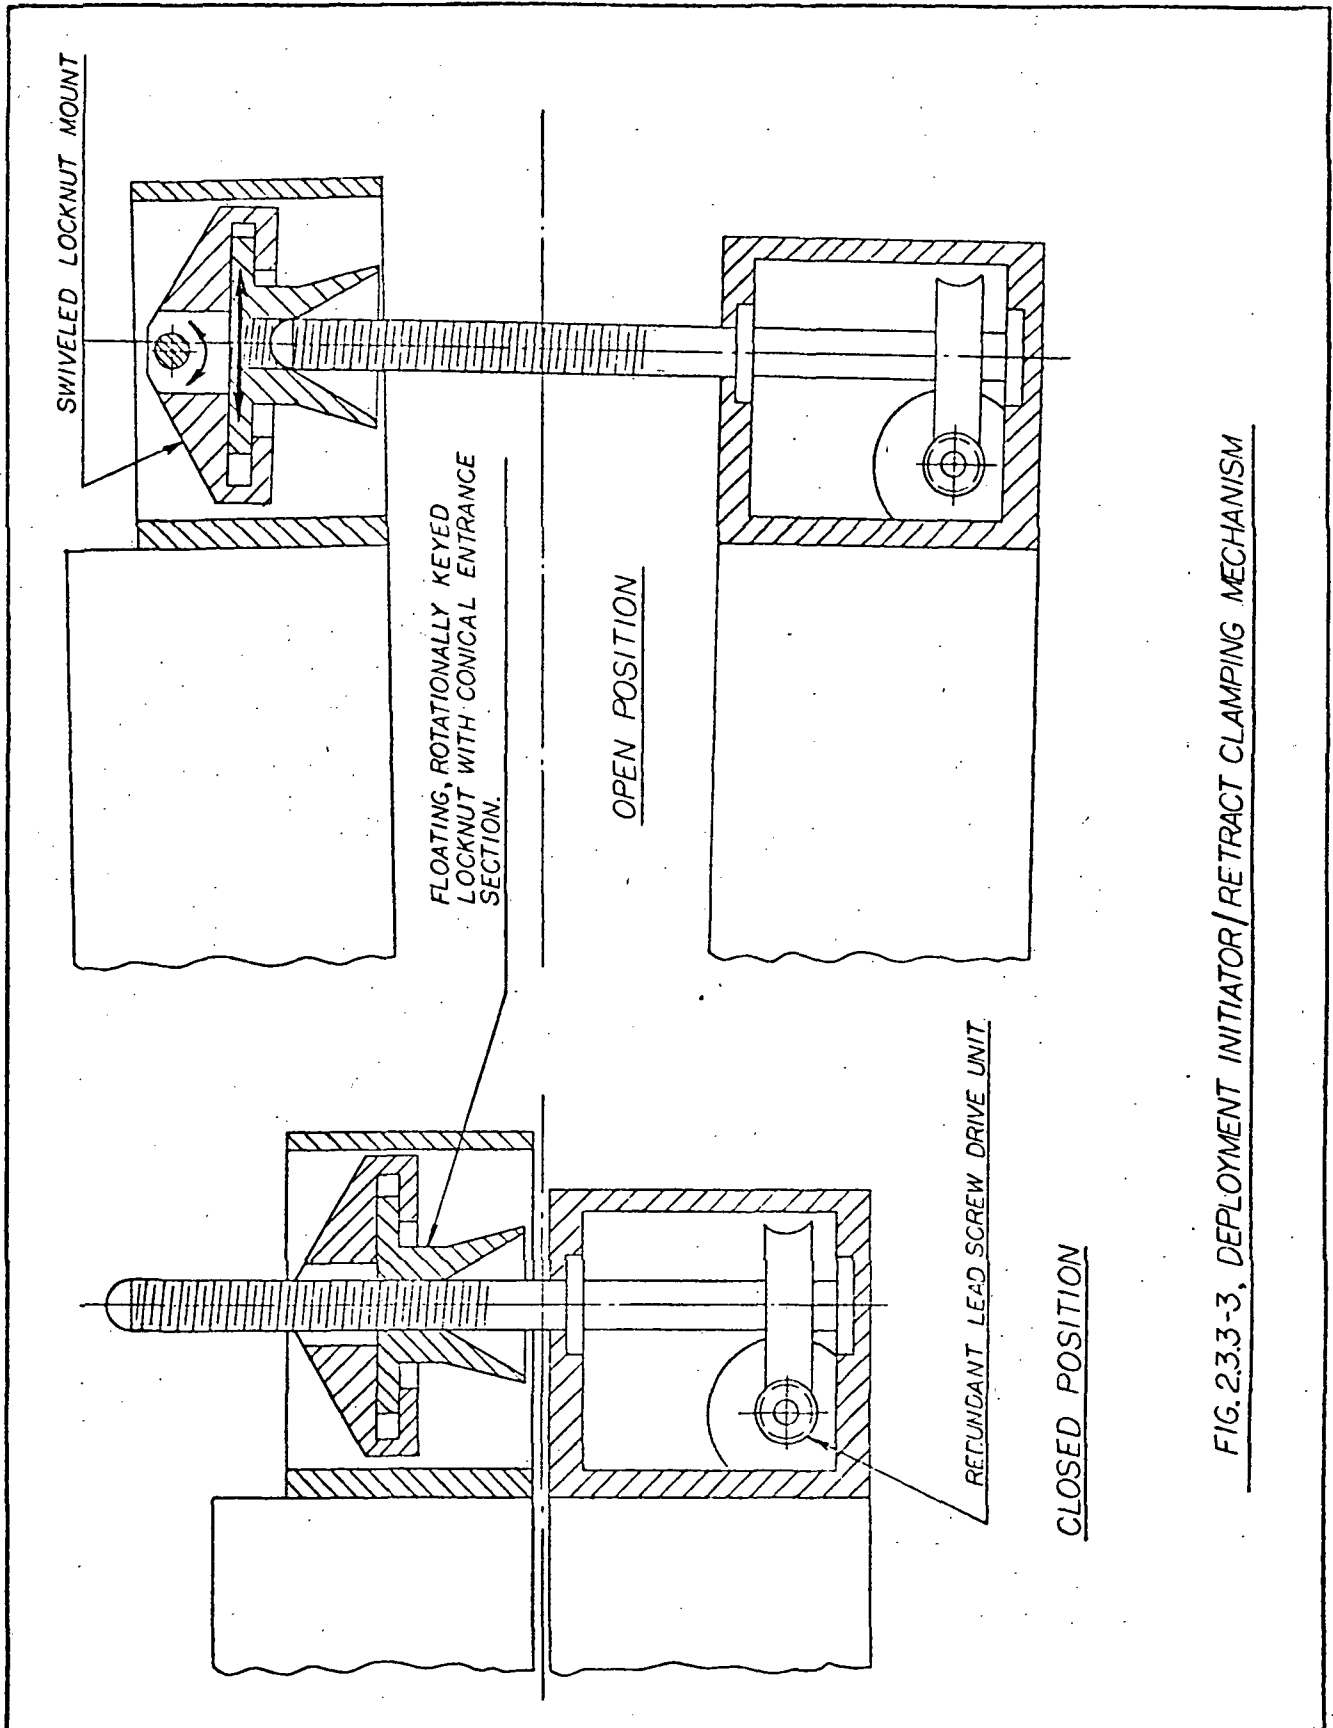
, DEPLOYMENT INITIATOR/RETRACT CLAMPING MECHANISM
